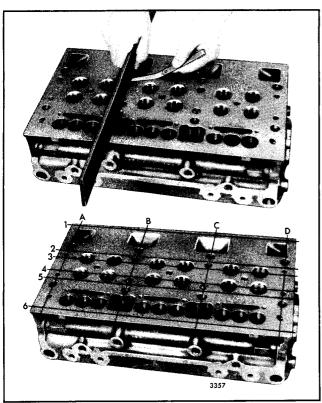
Checking Bottom Face of Cylinder Head for Warpage
